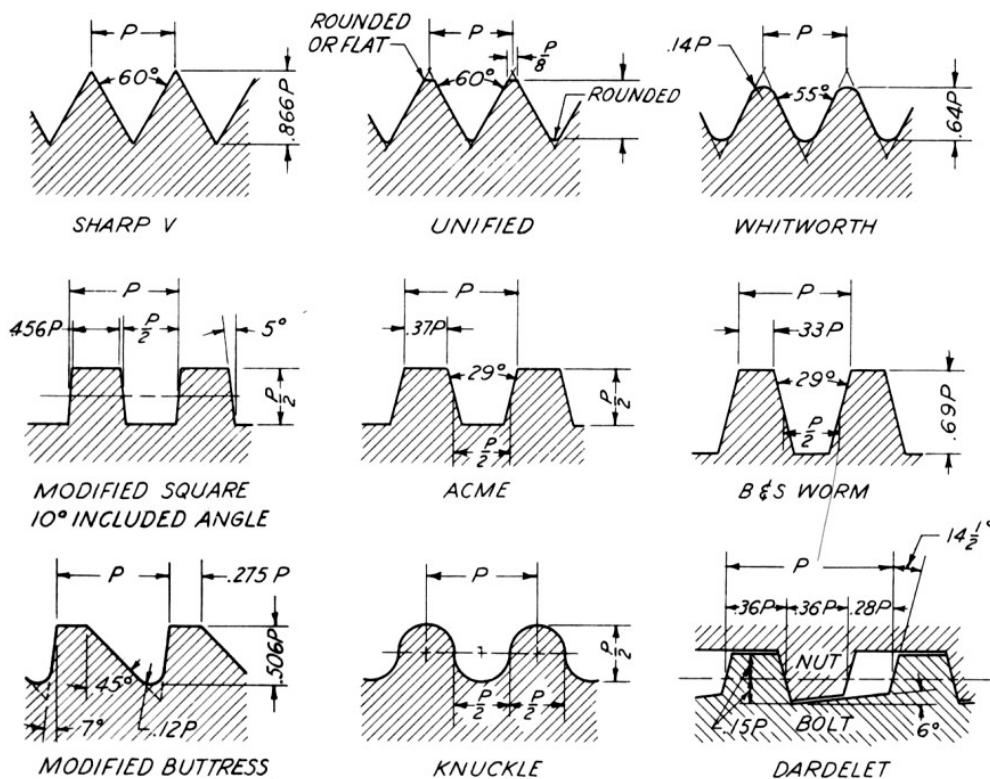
Basic dimensions of a screw <www.americanmachinetools.com>.
